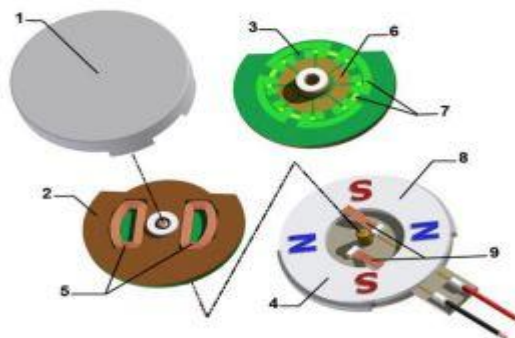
Vibration motors, :(1) Enclosure top, (2) Rotor (view as mounted), (3) Rotor (inverted view), (4) Enclosure bottom, (5) Coils, (6) Commutation points, (7) Alternating power supply circuits, (8) Ring magnet (showing representative polar zones), (9) Power supply brushes.
